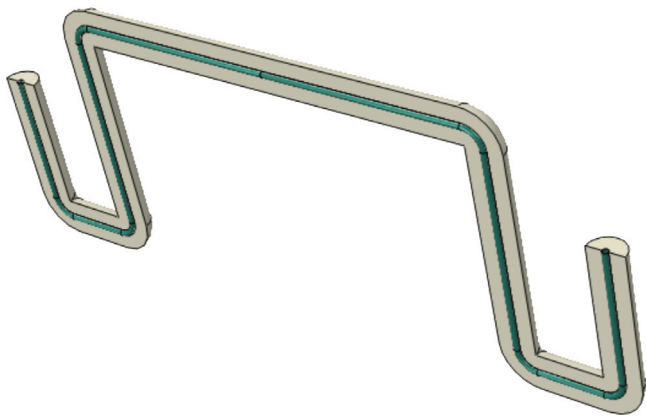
Assembly model of the M-shaped jumper and 1/2 of the water domain.
